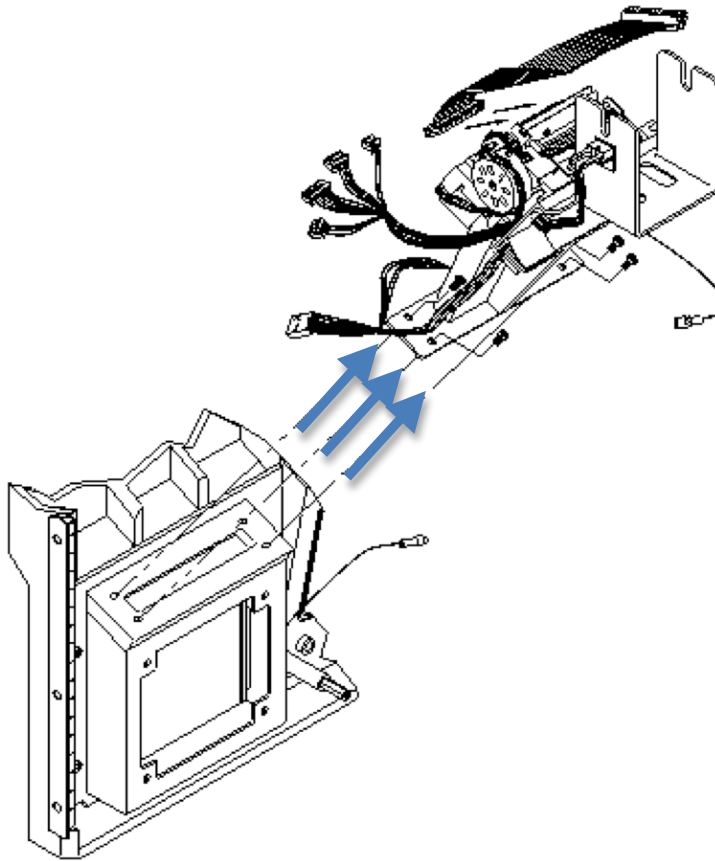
Uninstalling Current C/OPT Receipt Printer Option
